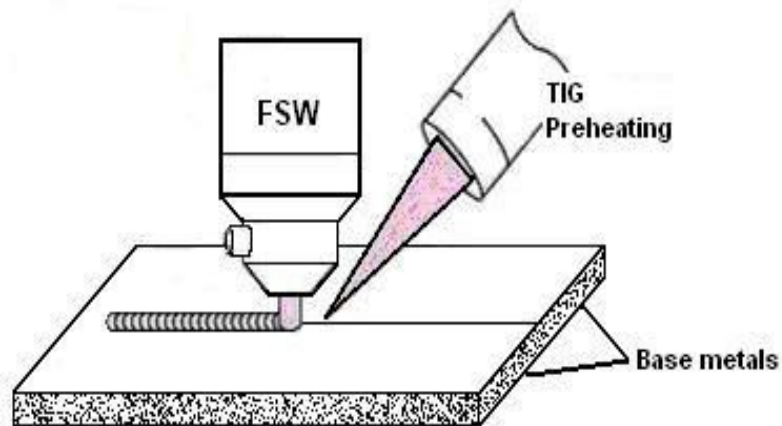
Schematic of TIG assisted friction stir welding
